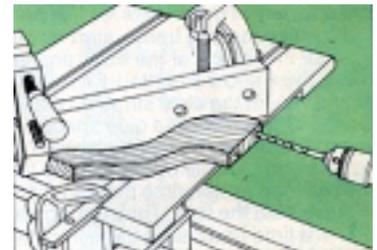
Boring dowel holes in legs. Note handscrew and C-clamp.
